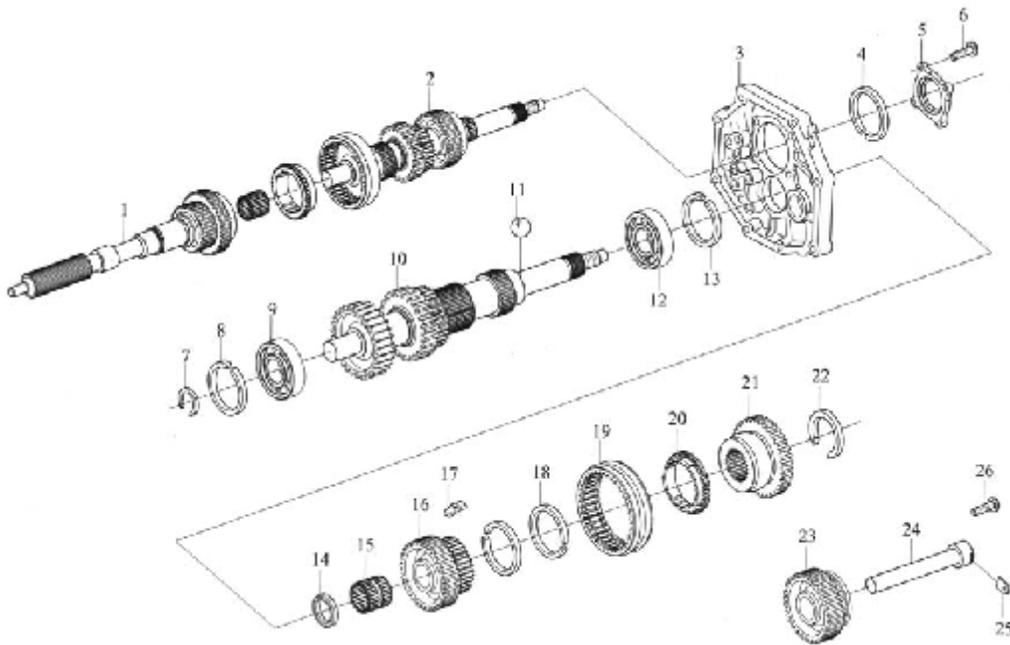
Intermediate Connecting Plate Component of Transmission (operating part)
